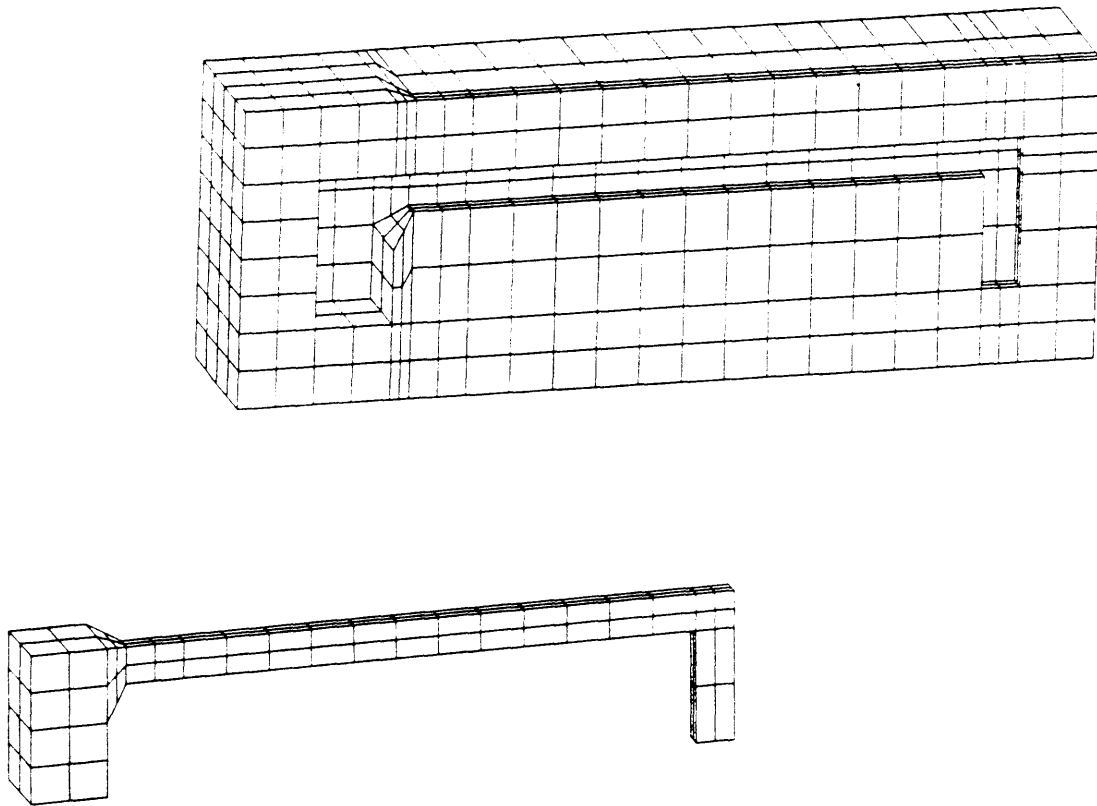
Finite element mesh for simplified hot tear casting and mold.
